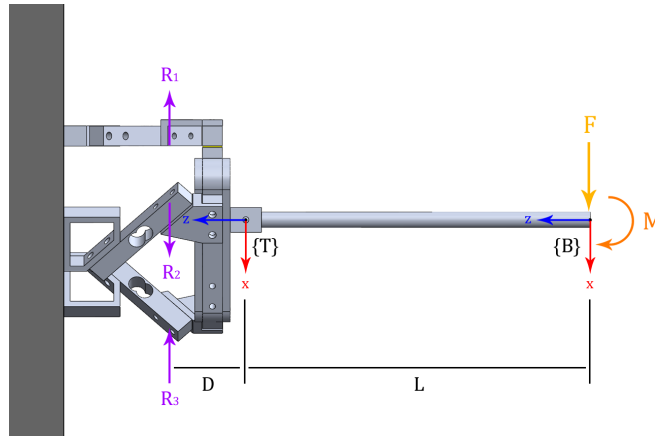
Testing bench as cantilever beam approach with simplified loads for explanation
